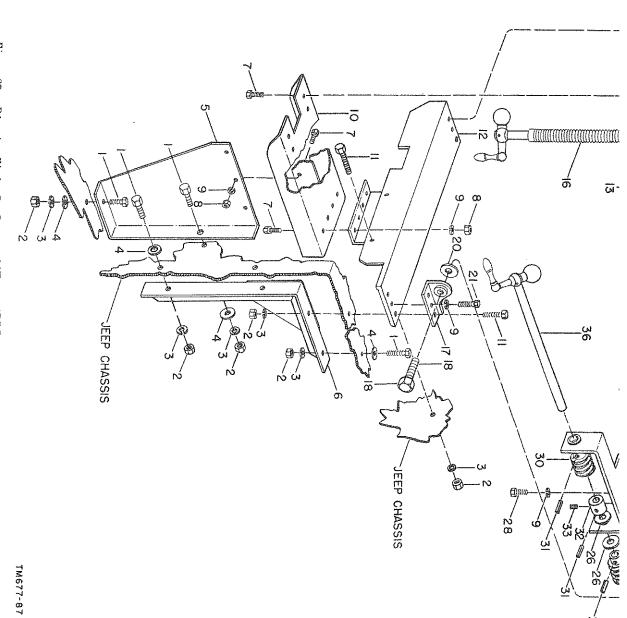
Direction Finder Set Support MT-1283/PRD-1, exploded view.
